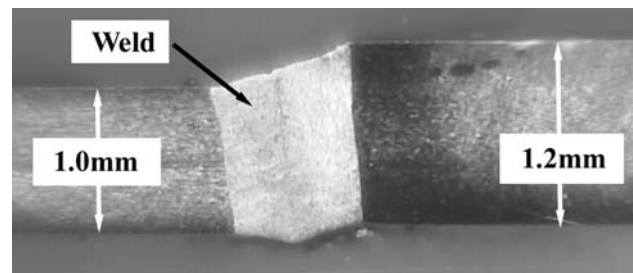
and 4 show, respectively, the weld surface and the cross-sectional weld profile obtained from a TWB (i.e., 1.0/1.2 mm) welded using a set of the optimal parameters. The weld surface was found clean and continuous
